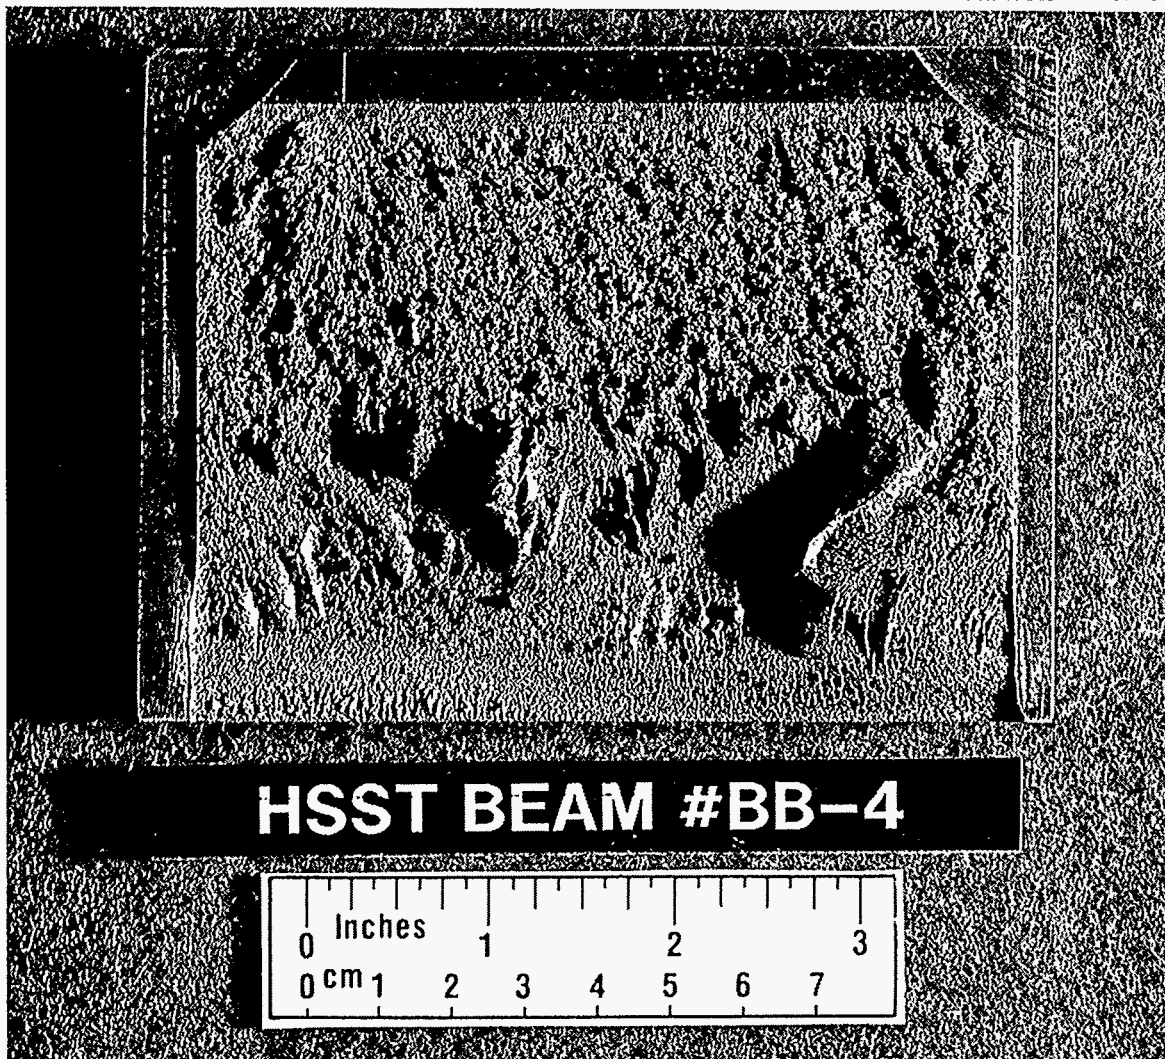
Fracture surface of shallow-flaw cruciform specimen BB-4 with fracture initiation site indicated
